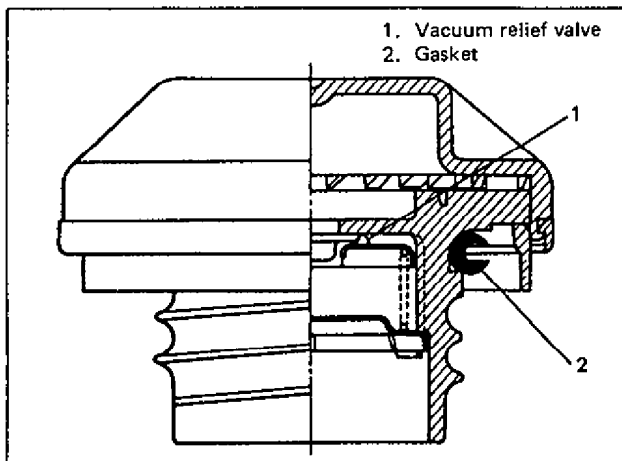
C-4 Fuel Filter Cap Cross-Section (One Way Valve Type)
